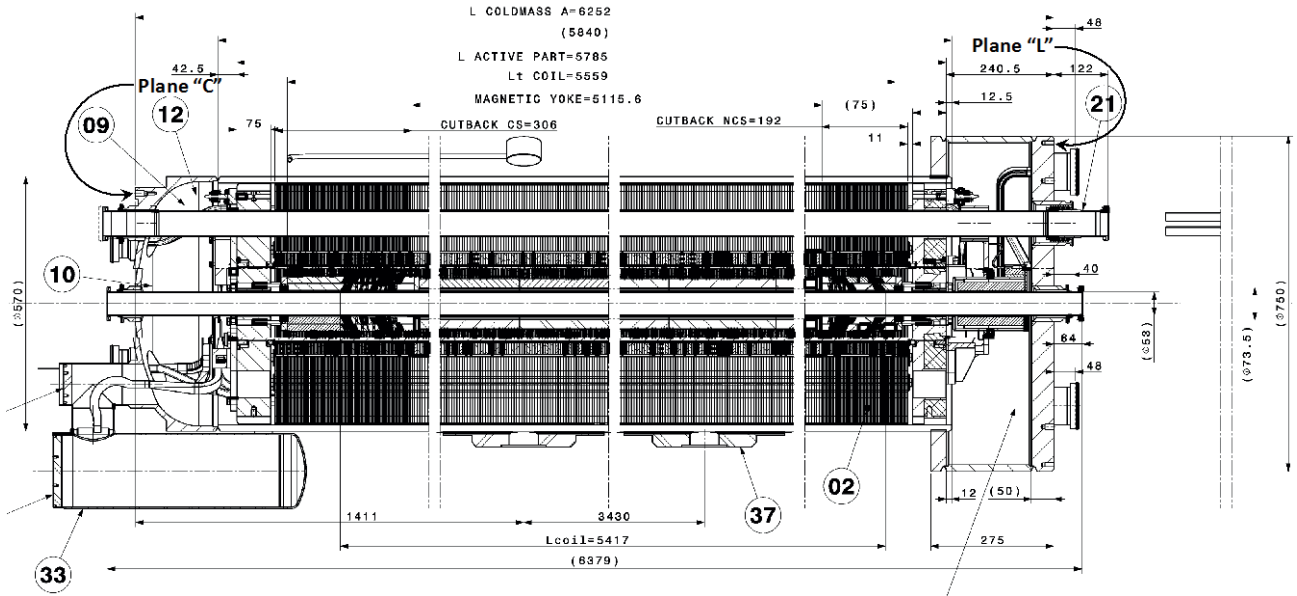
a: Longitudinal section of the cold mass assembly LMBHA, retrieved from drawing LHCLMBH_0001.
